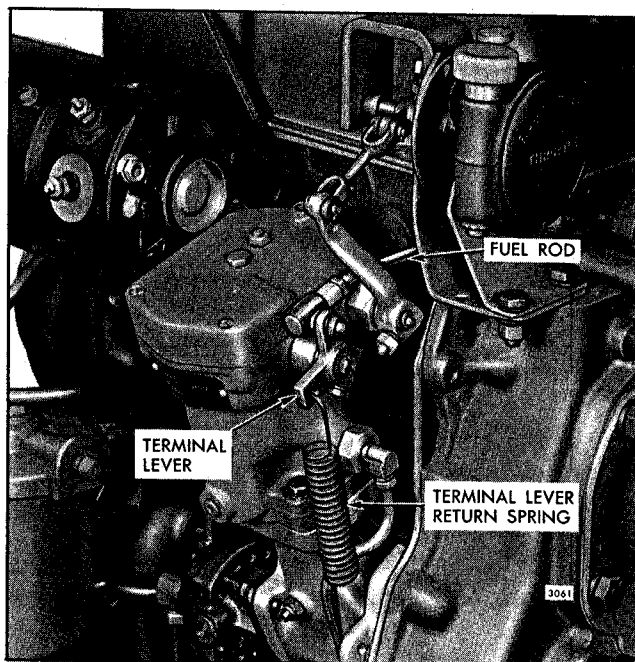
Hydraulic Governor Mounted on In-line Engine
